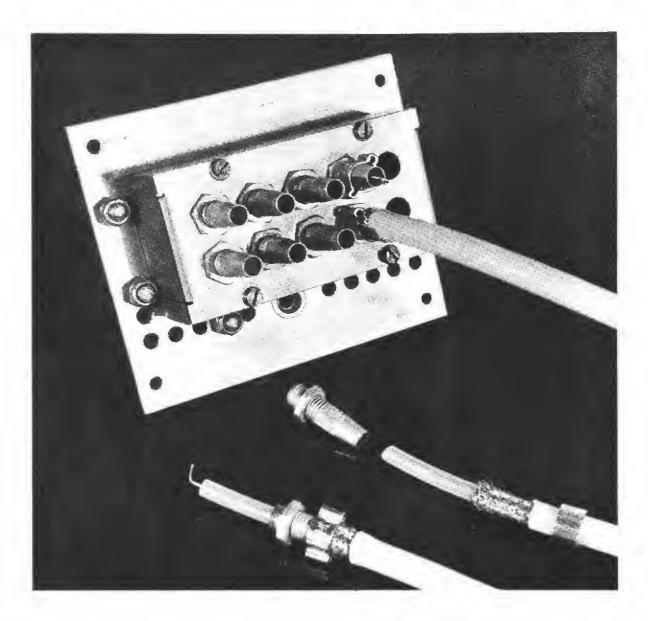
Rear connector block showing method of connecting coaxial cable.
